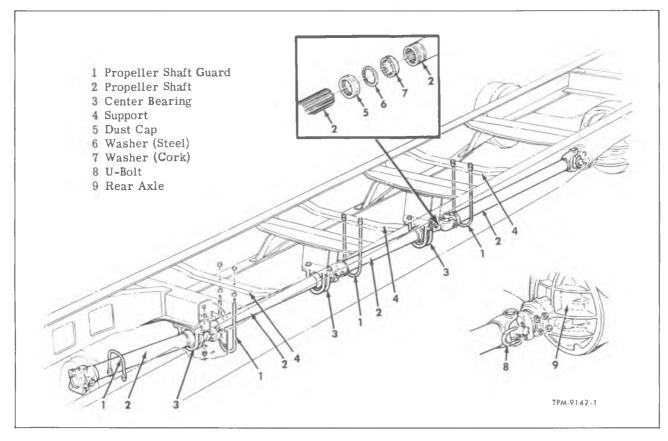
Propeller Shaft Guards Installed ("S" Series Shown)
